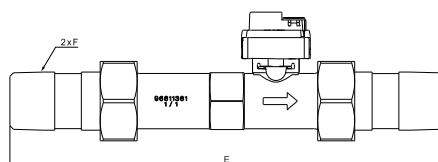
Dimensions, MFS 20-200 l/min, with adapters
